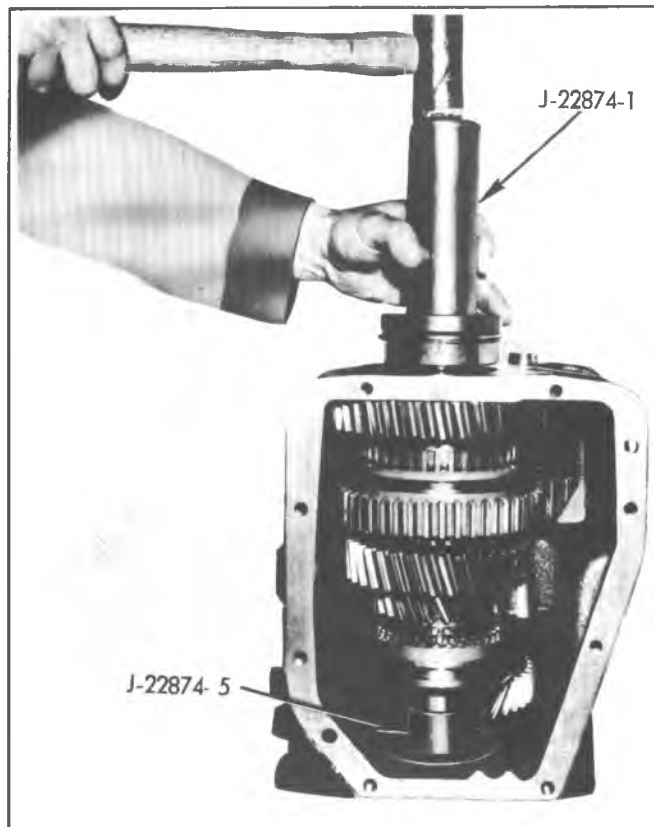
B-23L--Installing Mainshaft Rear Bearing
